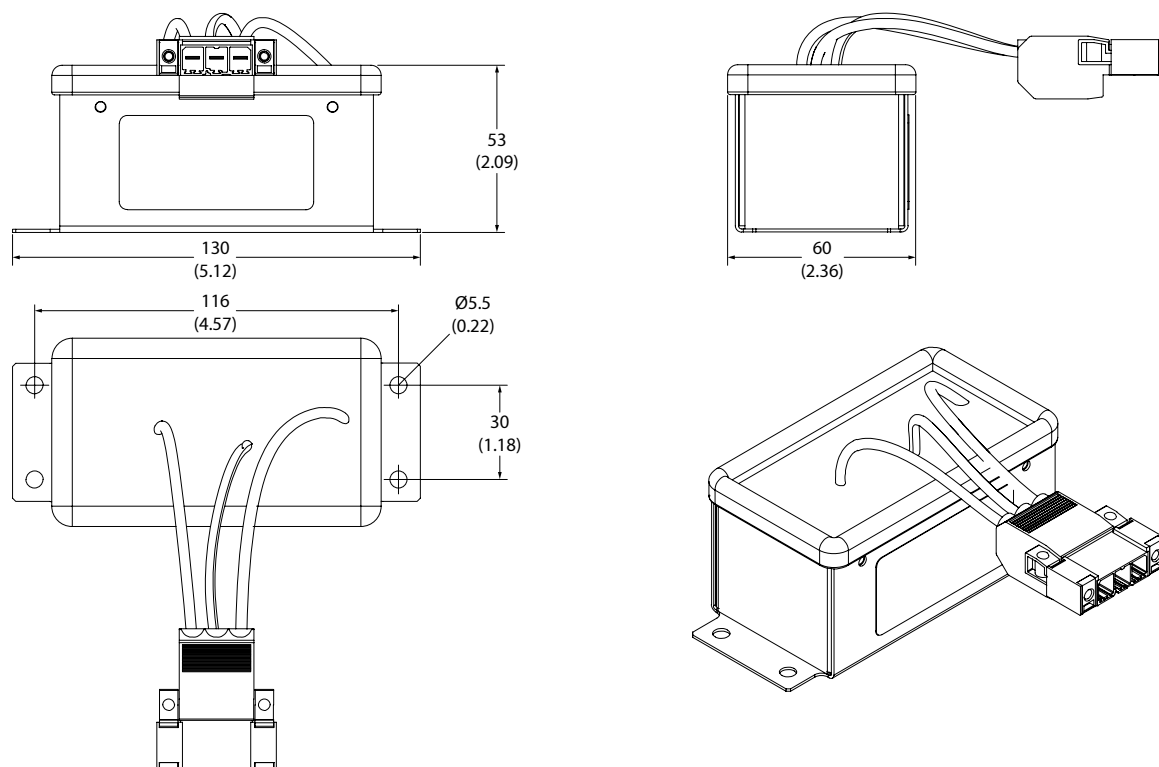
Dimensions of the AuxBus Temperature Measurement Board Assembly in mm (in)
